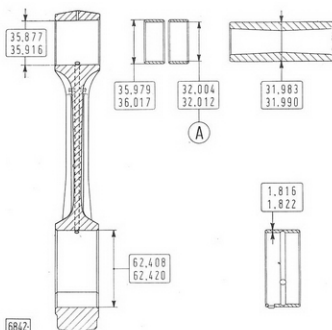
Connecting Rod, Big End Bearing, Small End Bush and Standard Gudgeon Pin Details
